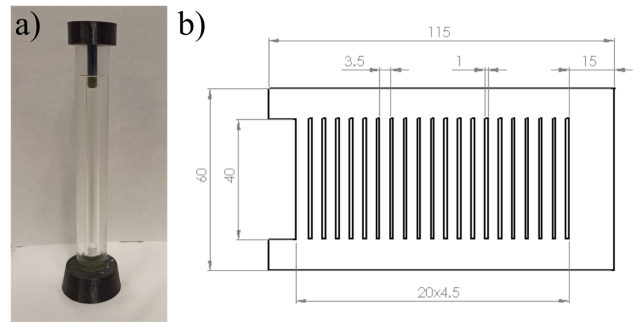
Actuator manufacturing. a) Mold filled with hydrogel solution to manufacture the chamber. b) Design and dimensions of the 3D-printed reinforcement.
